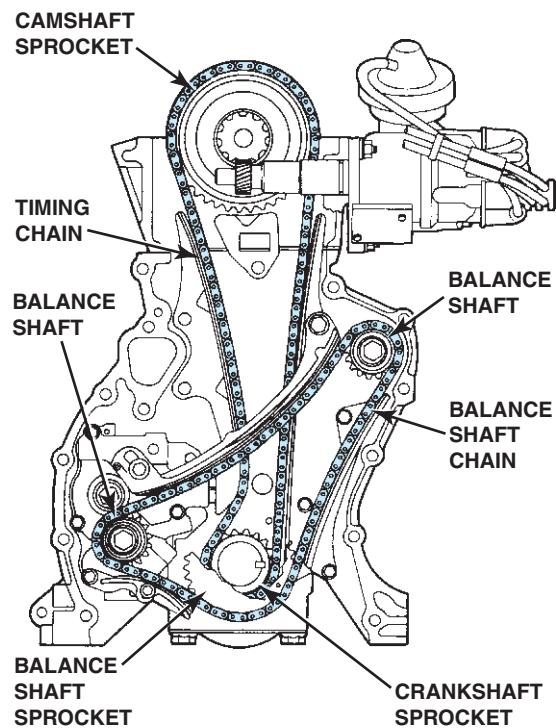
Worn balance shaft bearings and chains can be the cause of a noisy engine.
